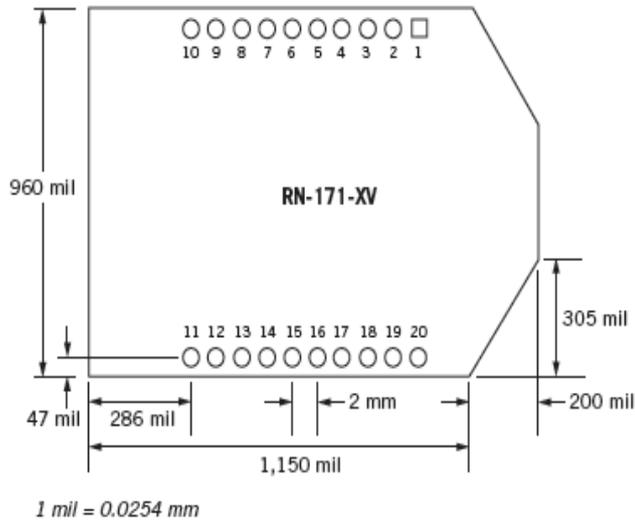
shows the pin pads and dimensions. Table 7 describes the pins.
